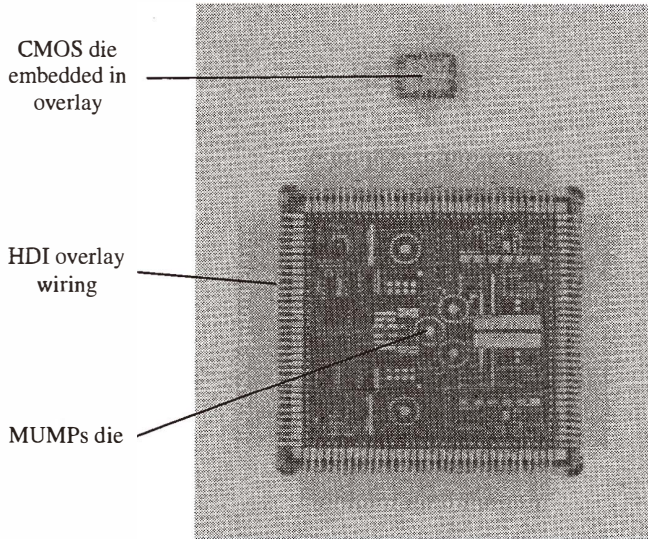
MUMPs surface micromachined test die in HDI/MEMS module.
